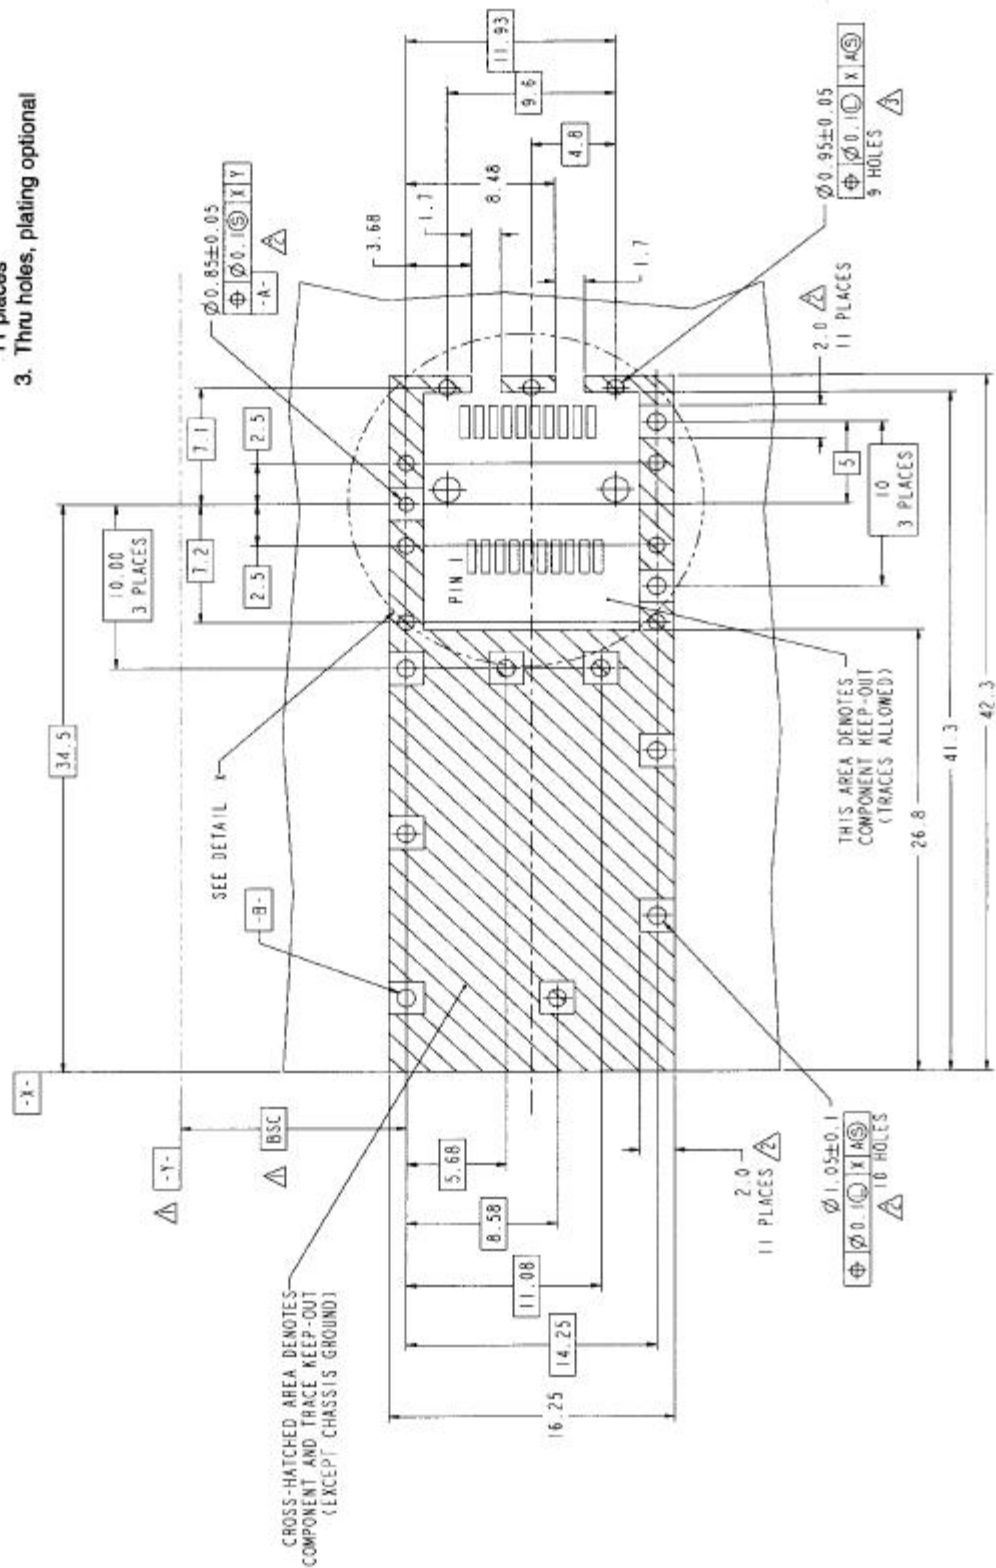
Recommended Board Layout Hole Pattern and Panel Mounting
